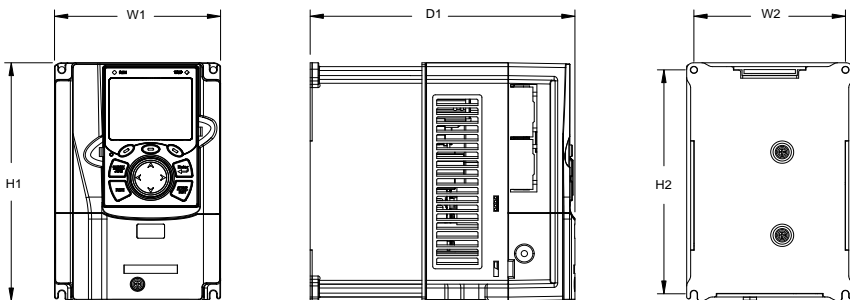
Wall-mounting diagram for 380V 1.5–37kW models
